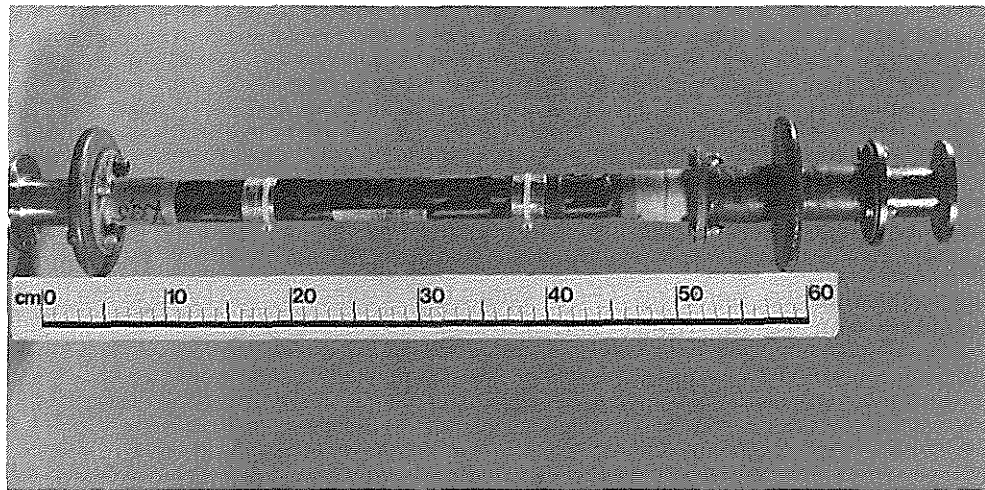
Test specimen with M40A drive shaft and GFC couplings
